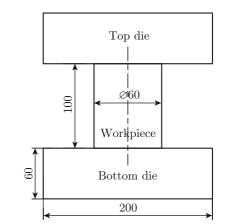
Diagram of workpiece, top and bottom die (mm)
